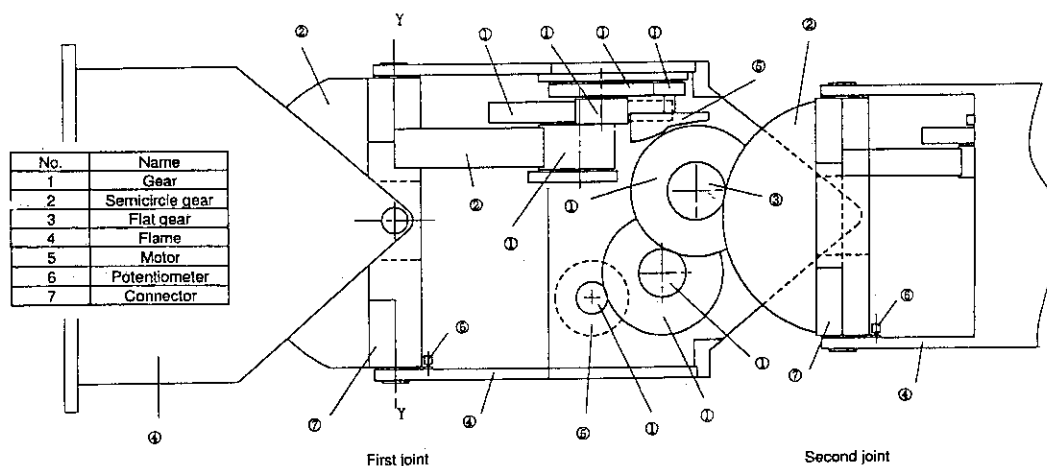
Cross section between the first joint and the second joint (Plan)
